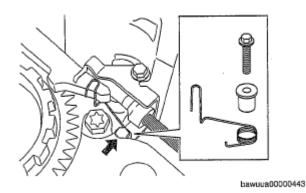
Identifying Spring Guide Sleeve And Torsion Spring Courtesy of MAZDA MOTORS CORP.
